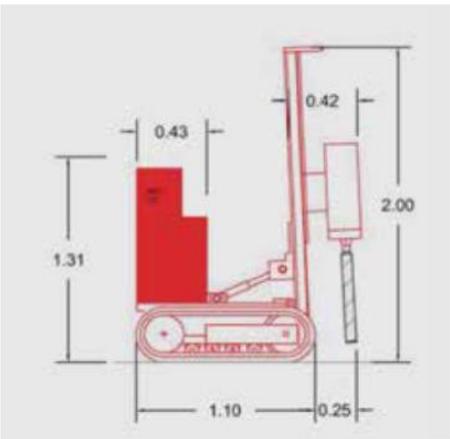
Sectional dimensions of the crawler with pile driving column or drilling rig in working position. ©GENOVATEK
